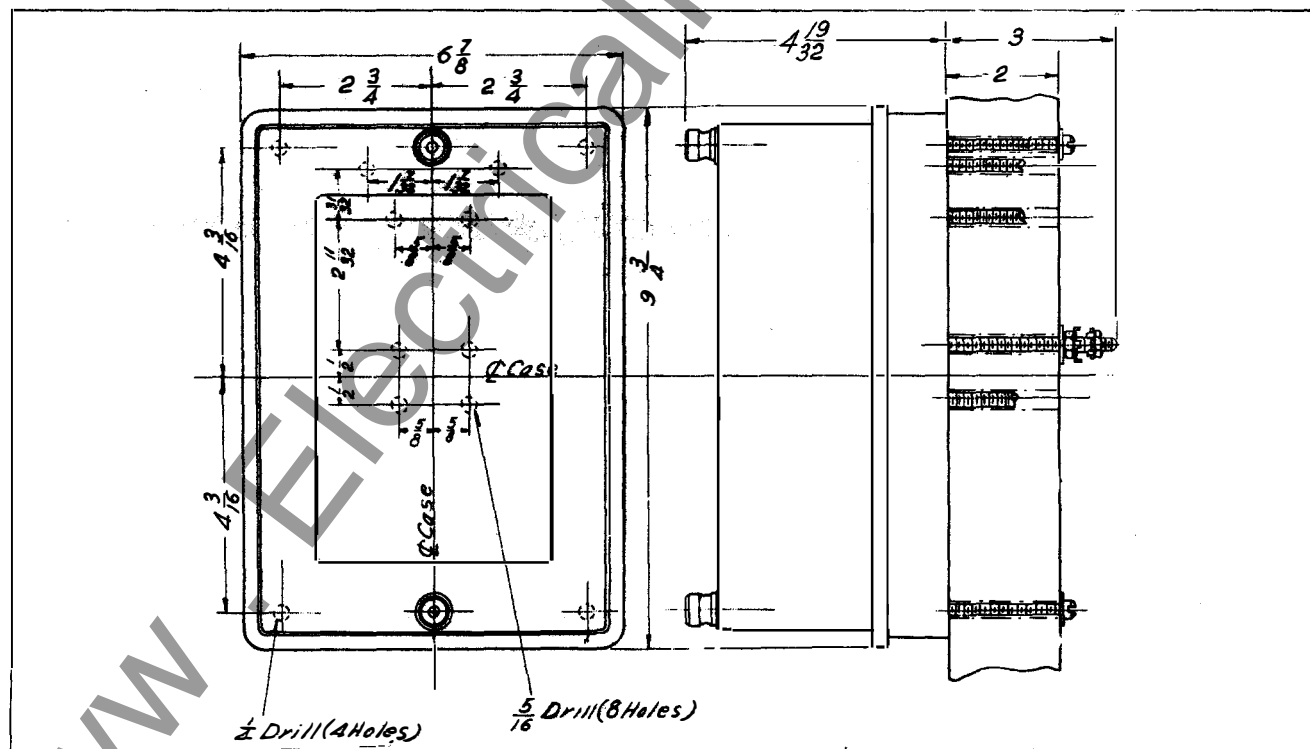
Outline and Drilling Plan for Mounting the Type RB Relay on Panels of Slate, Ebony Asbestos or Other Insulating Material. For Reference Only.
